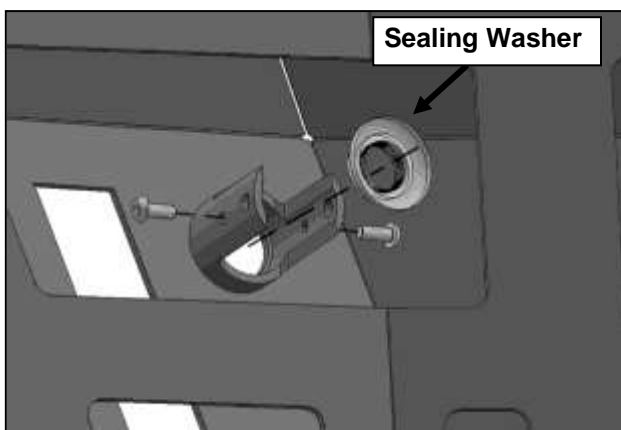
Remove sensors and wiring harness (if equipped) from bumper
